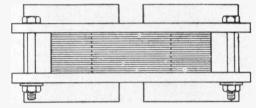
BOLT ON TWO WOODEN PIECES FOR CLAMPS
